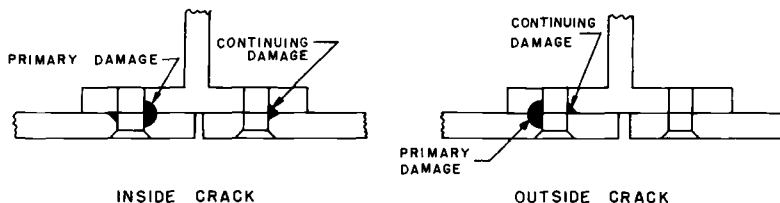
Initial damage for center-stringer-reinforced, split-skin specimen.
